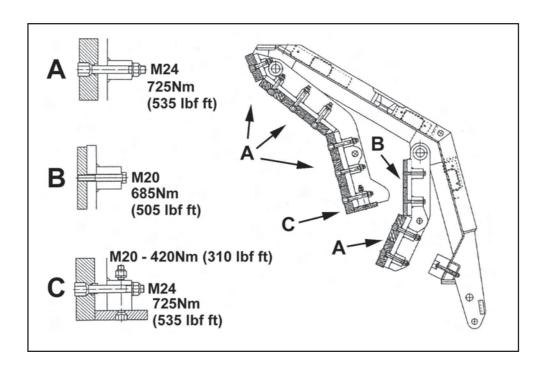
Front & Rear Impact Plate Bolts - Tightening Torques
